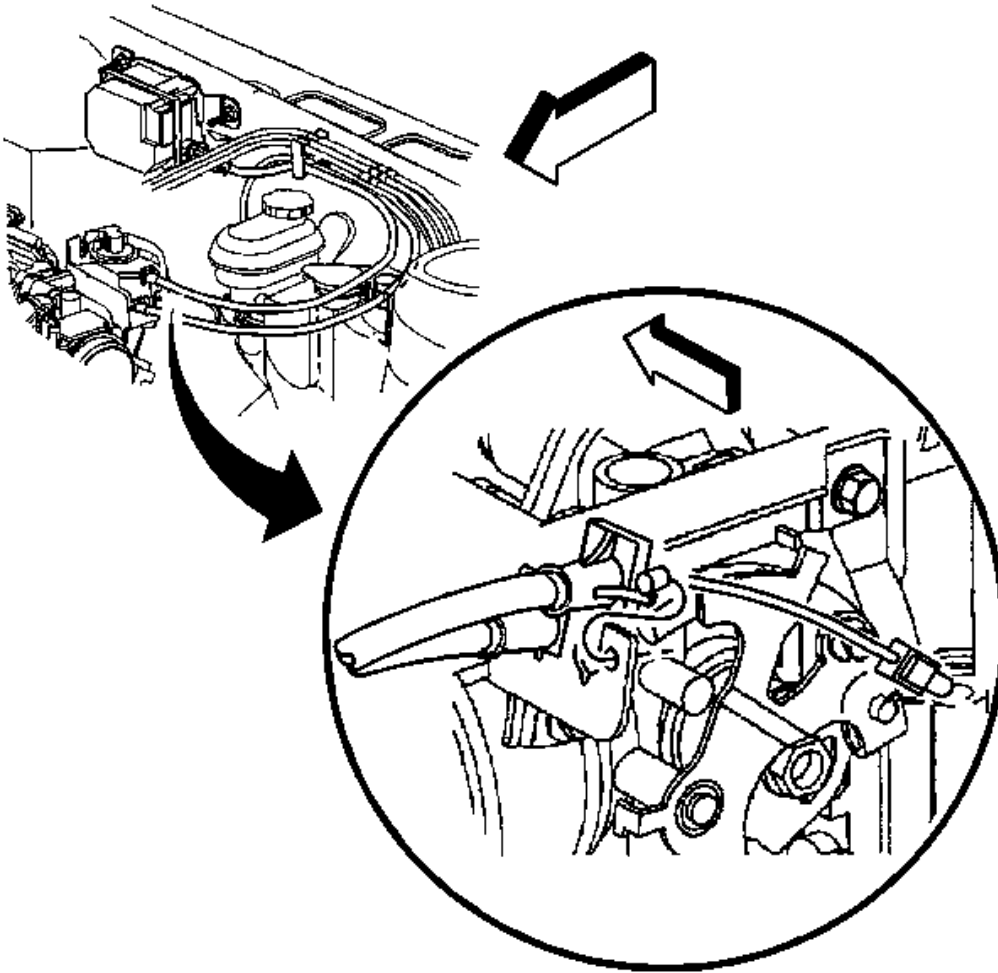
View of Cruise Control Module Electrical Connector & Cable
